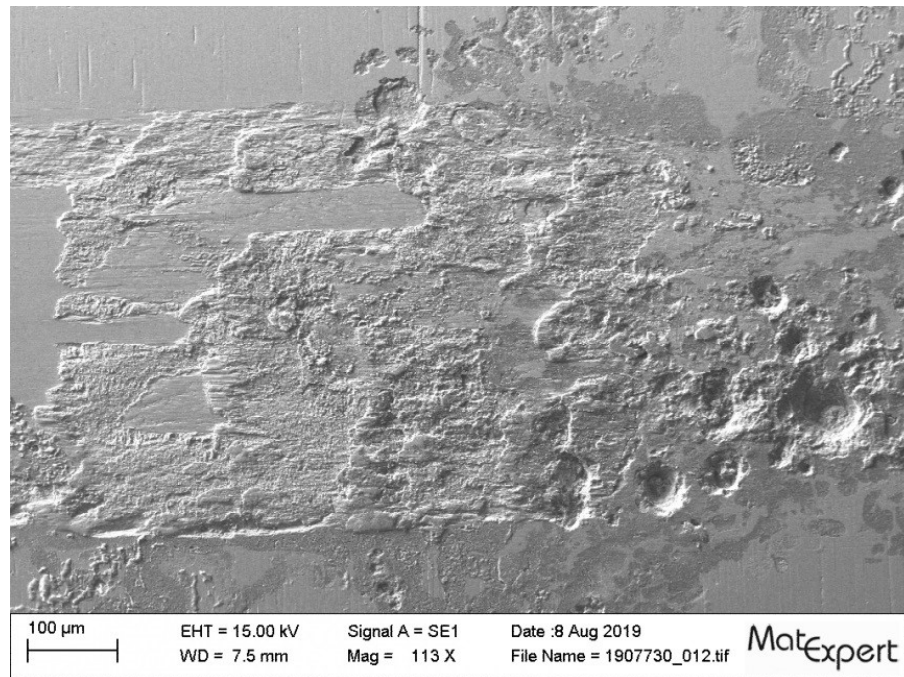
Bearing no. 3, inner-race bearing track – pitting and filiform corrosion.
